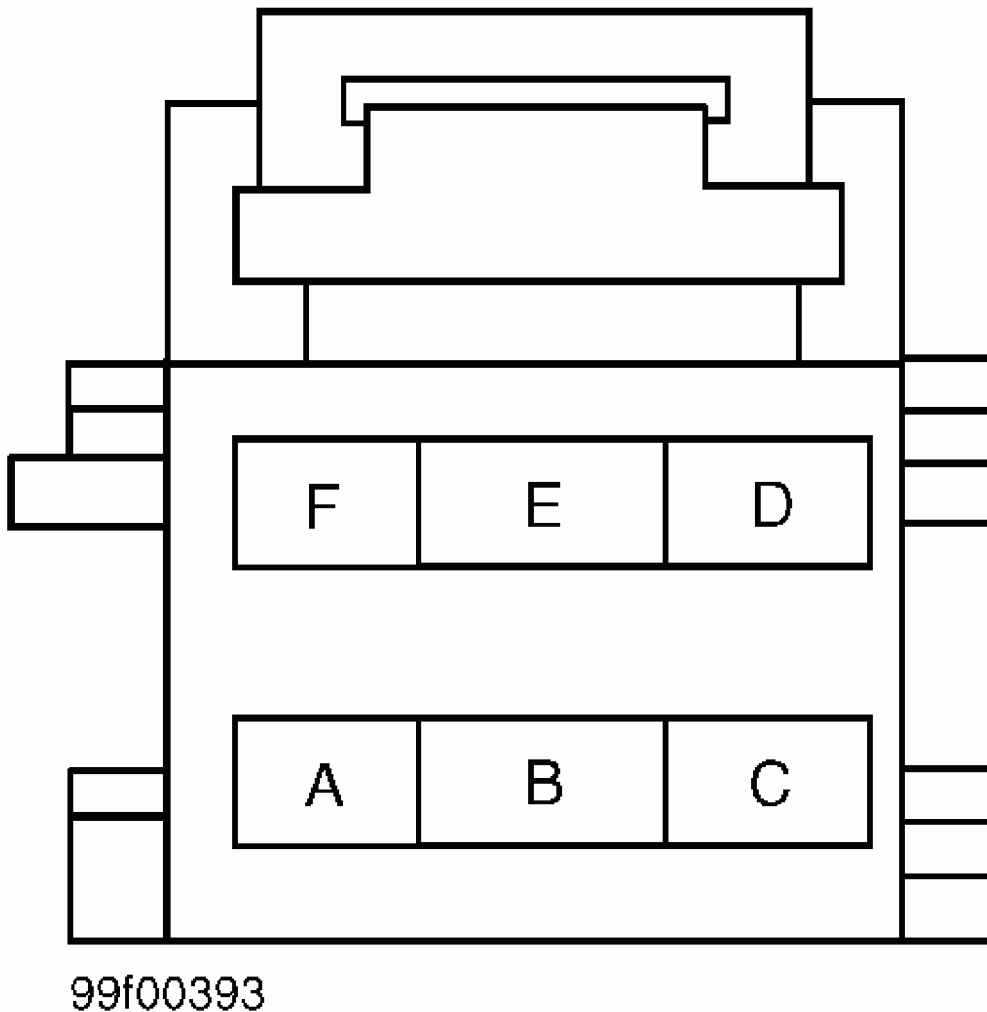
Identifying Passenger-side Air Bag Module Disable Switch Connector Terminals
